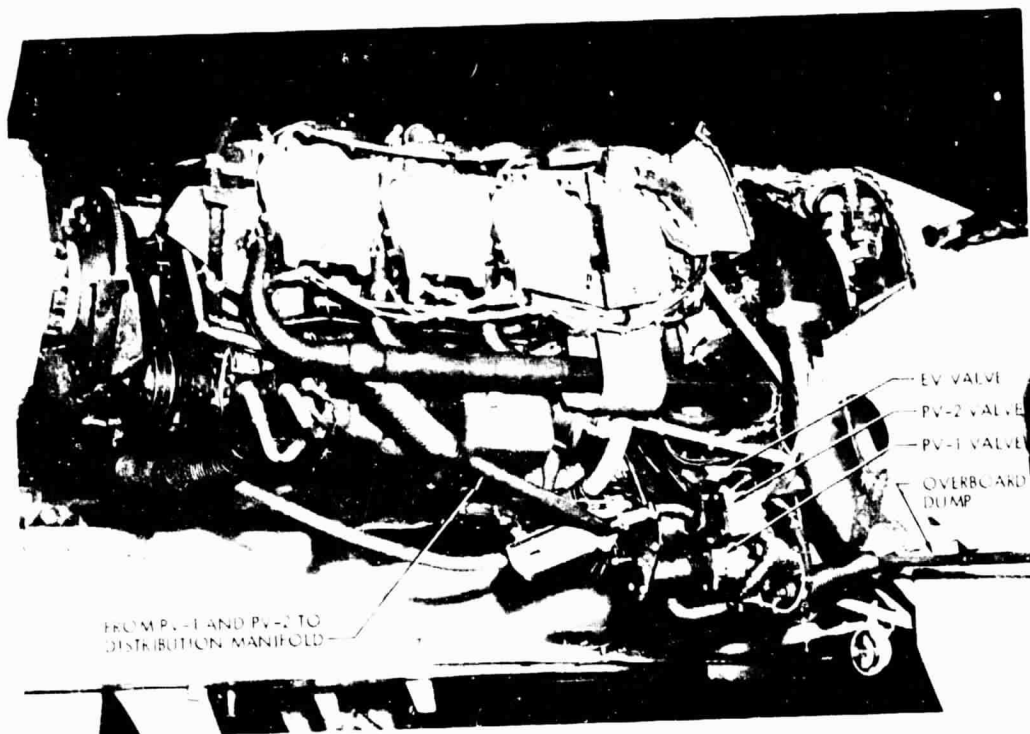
Lower Left Side of Engine Showing Valve Cluster Assembly
